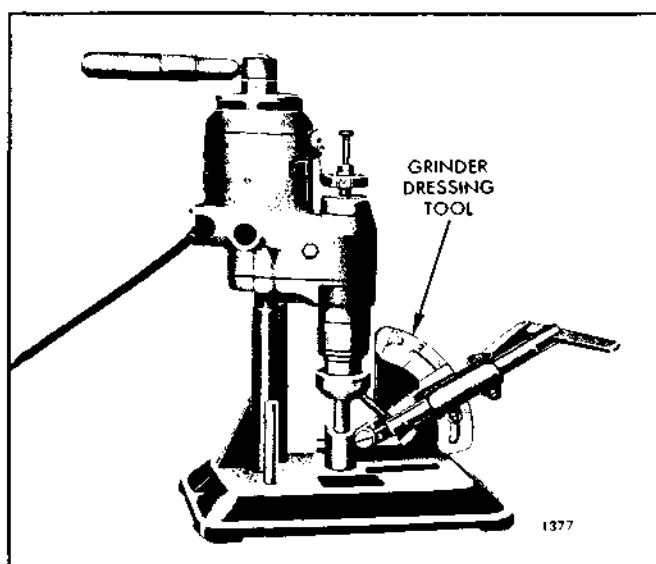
Grinding Wheel Dressing Tool of Set J 8165
